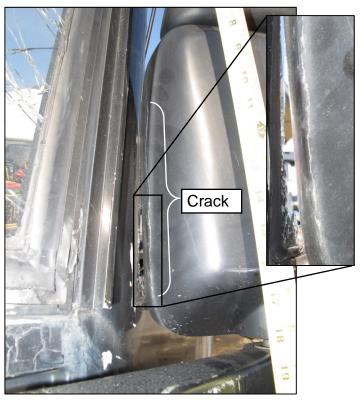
Close view of the inboard side of the left side-view mirror viewed looking rearward where a vertical crack was observed in the mirror housing as indicated. The detail view shows a closer view of the lower end of the crack with accumulated white deposits along the crack surfaces.
